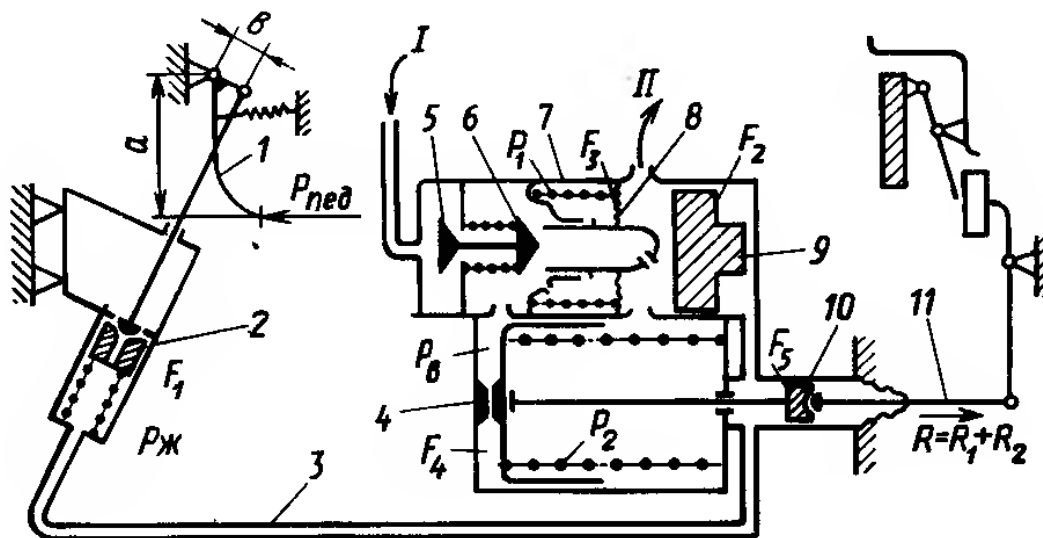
Diagram of the pneumatic amplifier of the hydraulic clutch drive: 1 - drive pedal; 2 - the master cylinder; 3 - hydraulic line; 4 - pneumatic cylinder; 5 - inlet valve; 6 - atmospheric valve seat; 7 - tracking device; 8 - membrane; 9 - the piston of the tracking device; 10 - hydraulic cylinder; 11 - stock
